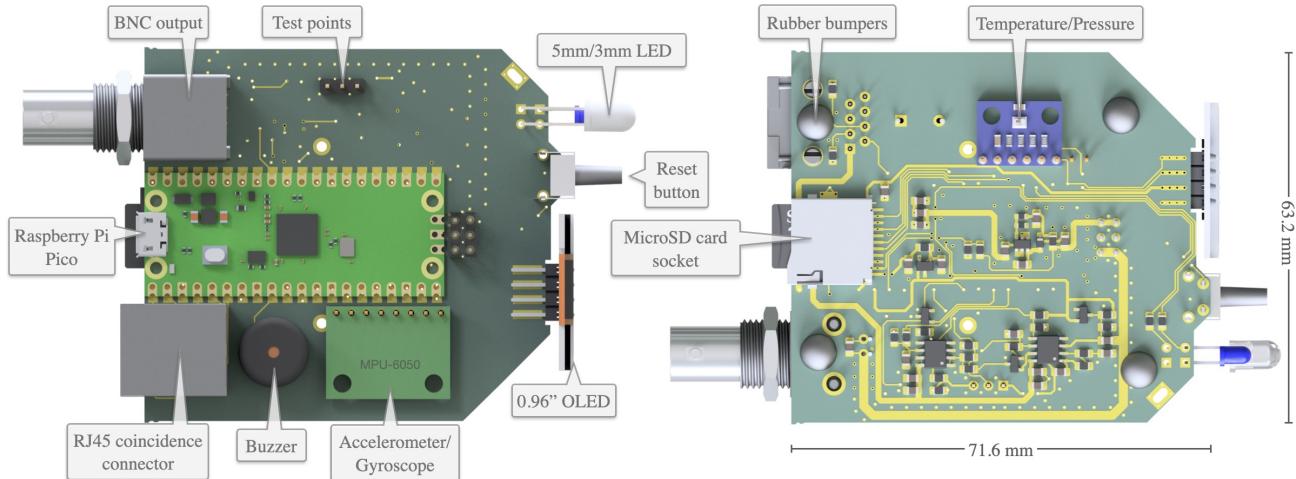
A 3D rendering of the Main printed circuit boards. Left: Top view. Right: Bottom.
